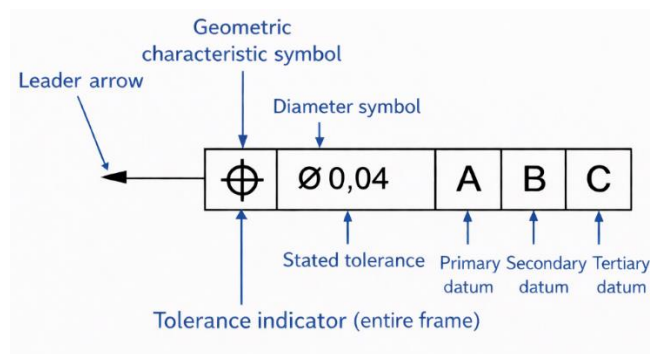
Example of a tolerance indicator showing a position tolerance.
